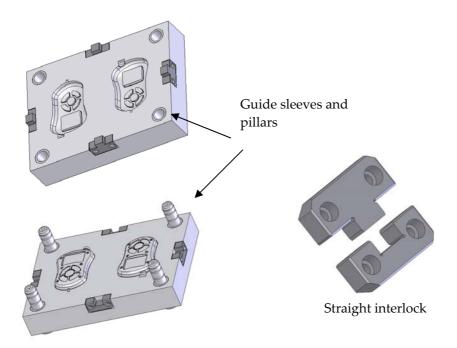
Side interlocks for high pressure die casting die and for example for injection molding mould. Side interlocks will guide the die halves more accurately together than the standard guide pillar and sleeve system. Guide pillars and sleeves are manufactured to tolerate some thermal imbalance between the two die halves, but at the same time they allow some inaccuracy in positioning the die or mould halves.
